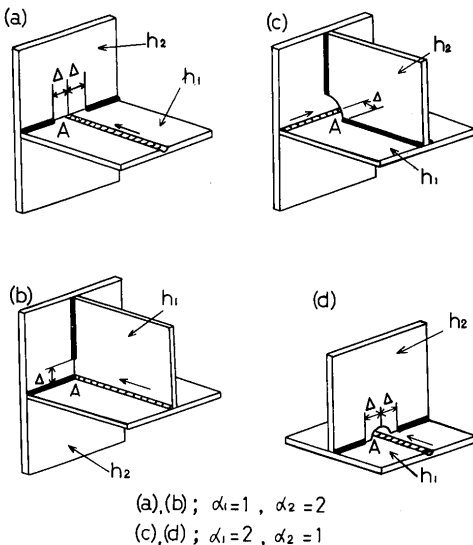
Example of weld joint restrained by shearing force through fillet welds.
